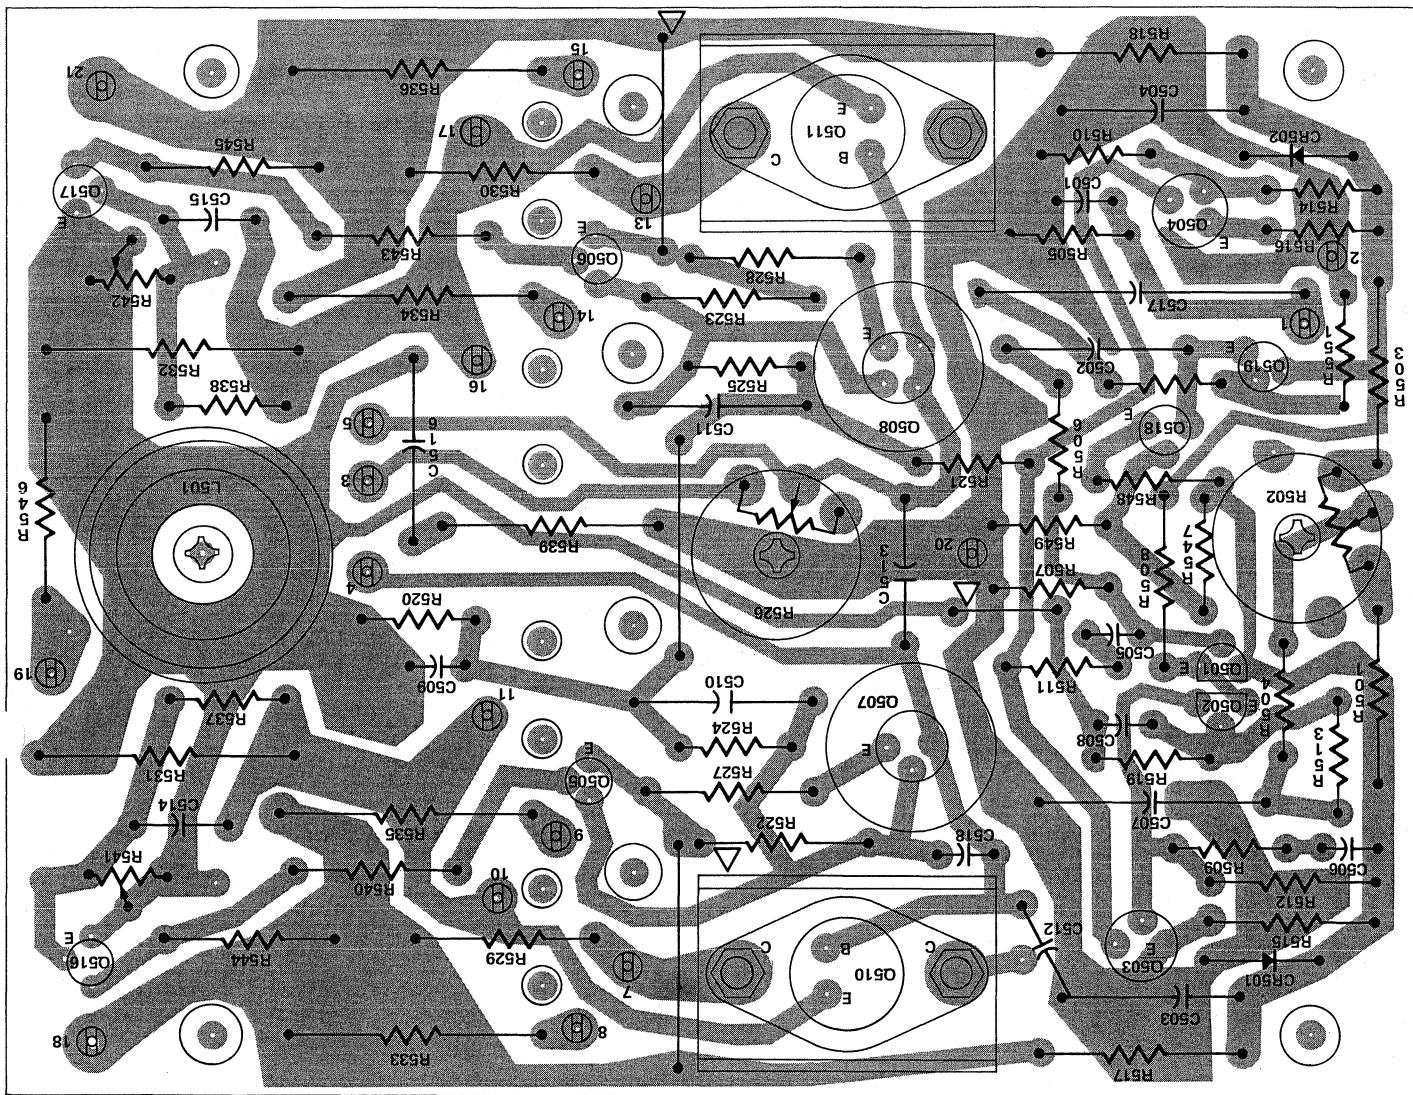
Power Supply Board - A7 Component Assembly Diagram
